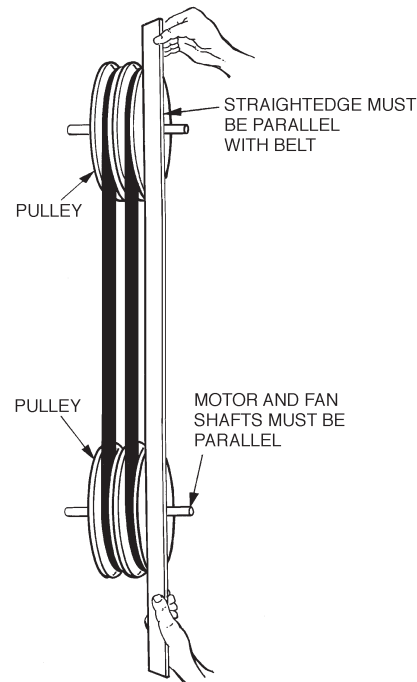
Evaporator-Fan Alignment and Adjustment
